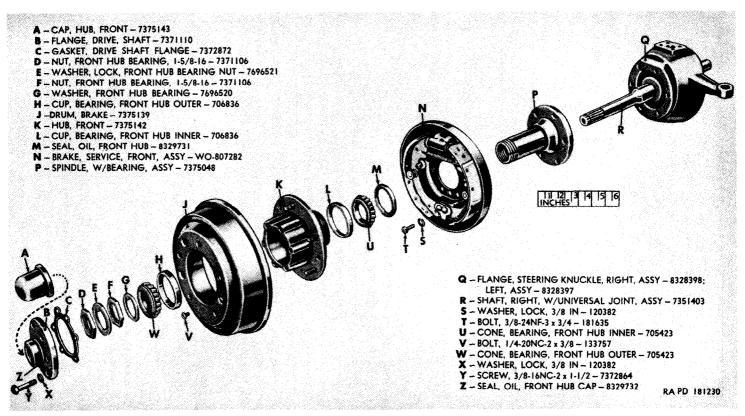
Front axle brakedrum, and hub assembly-disassembled view.
